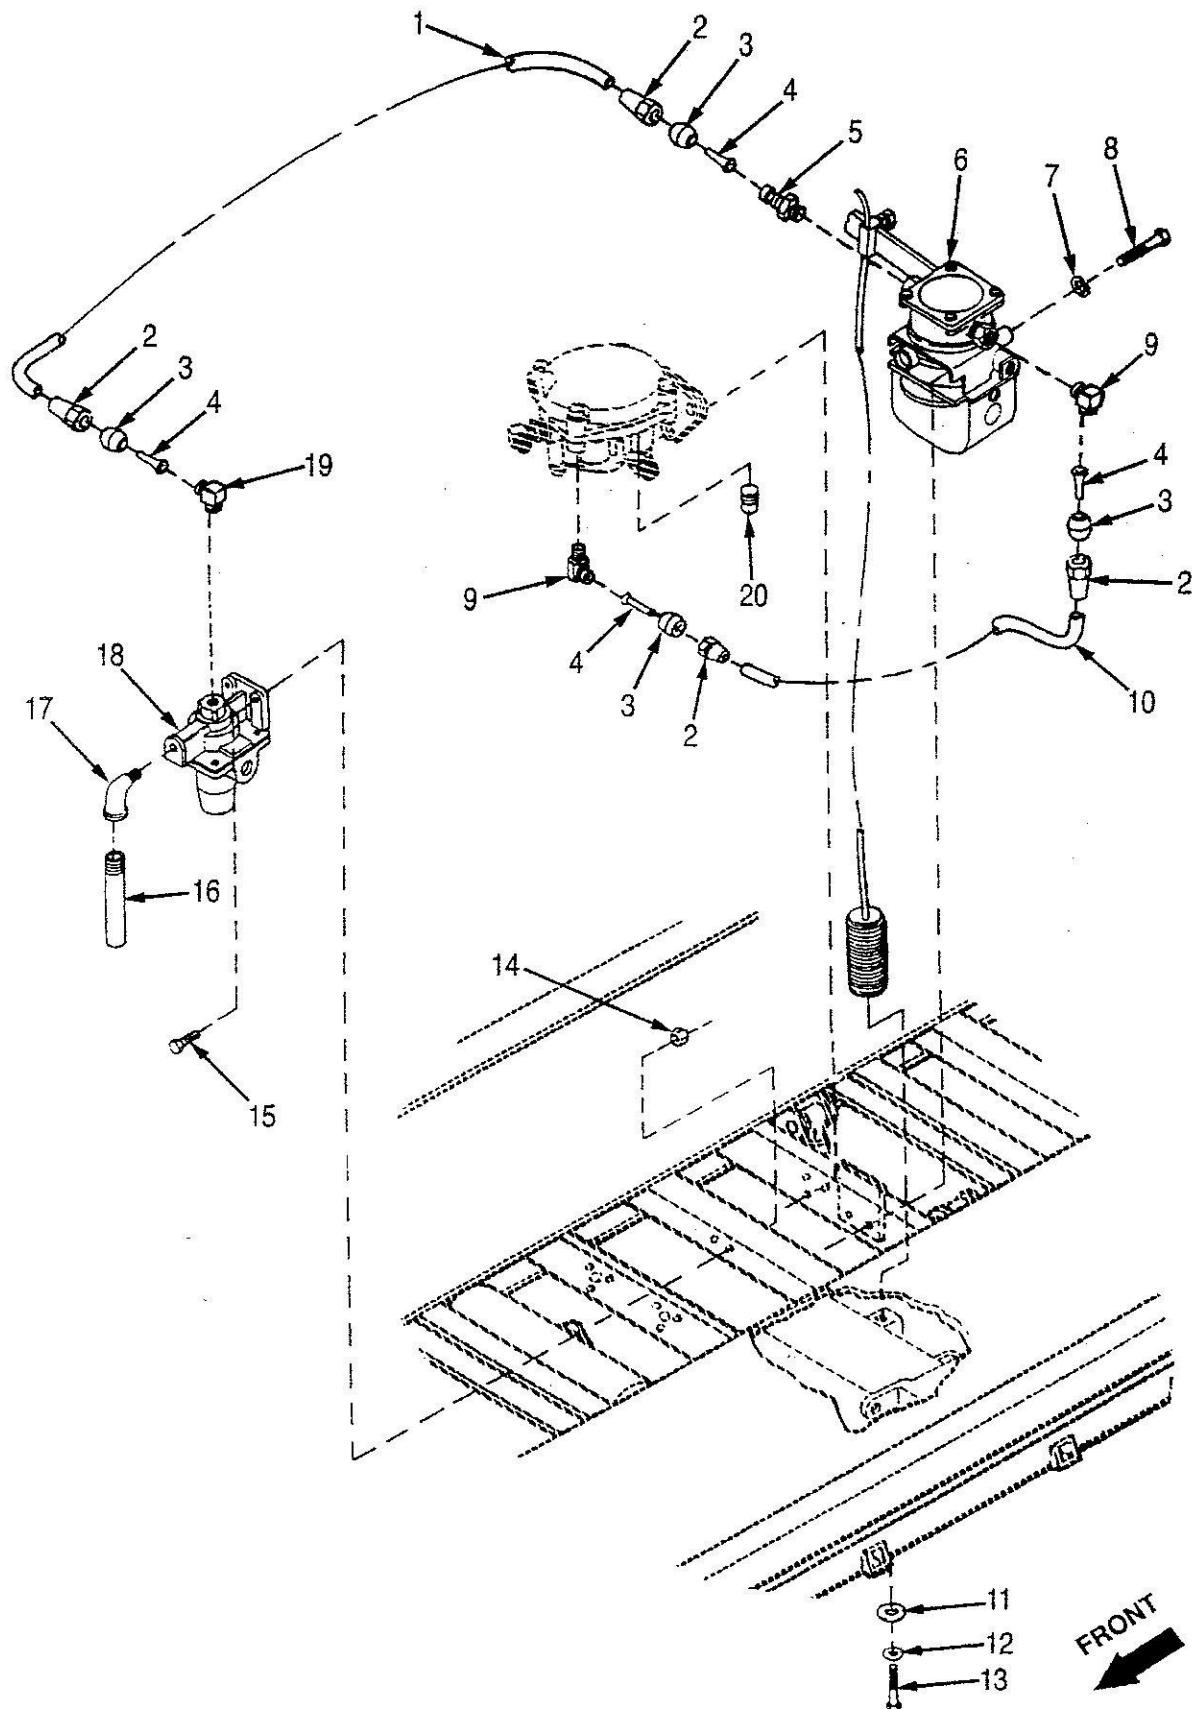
Load Sensing and Halfway Brake Valve Assemblies, Hoses and Fittings
